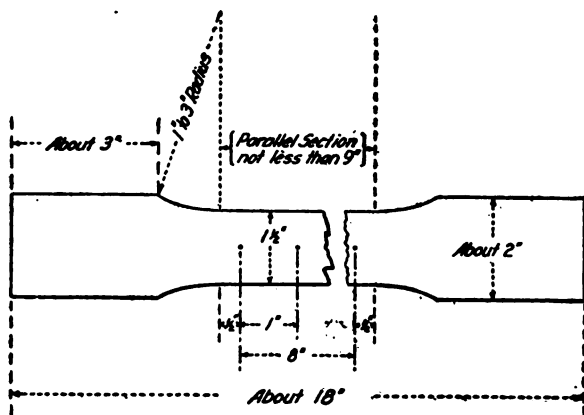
Form and dimensions of test specimen for tension and bending tests of plates, shapes, and bars.
